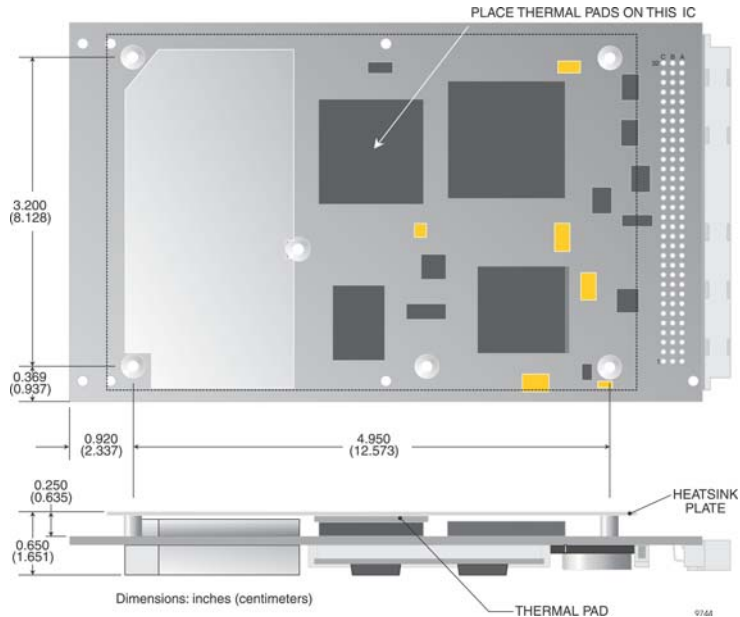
ZXW-Eurocard Mounted with Heat-Sink
